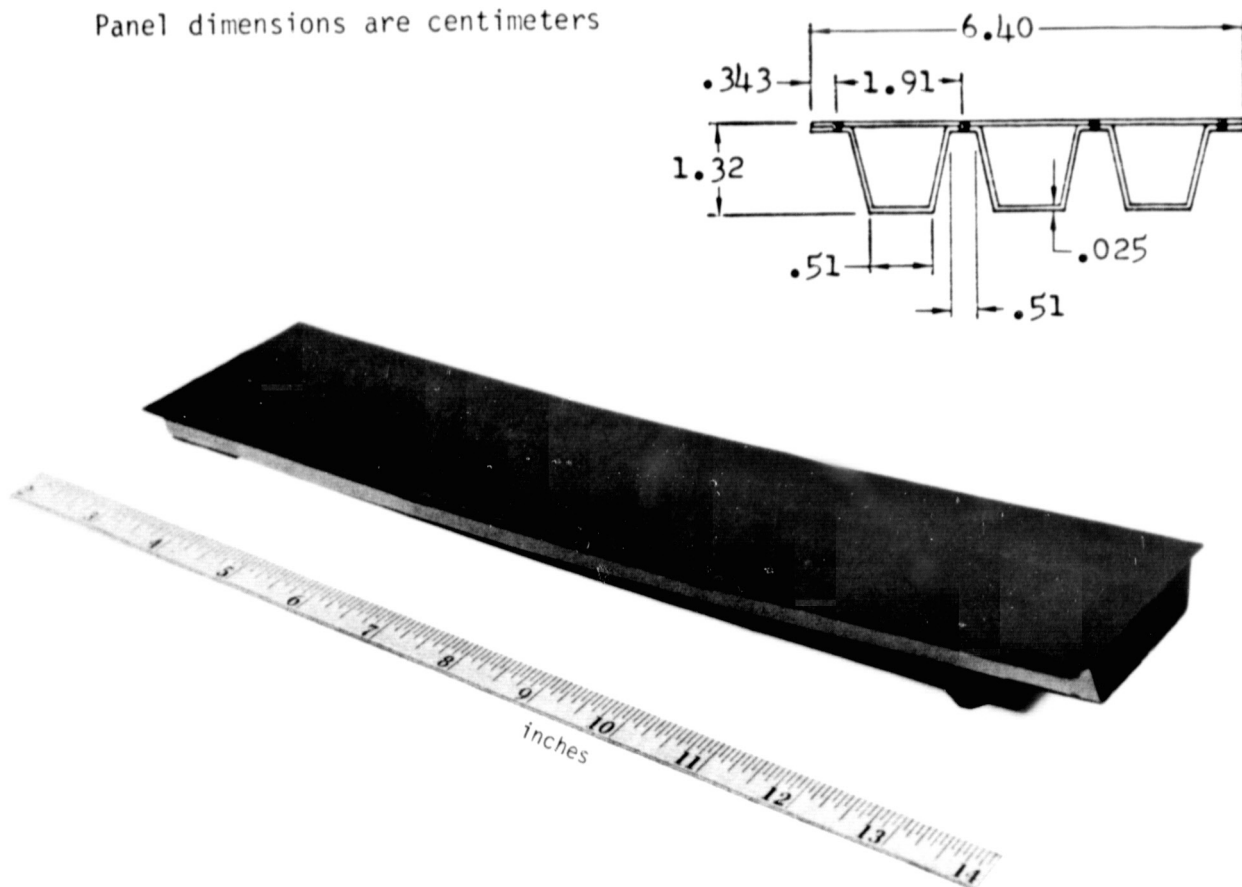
SUBSIZE PANEL L3 CROSS SECTION AND PHOTOGRAPH AFTER TEST
